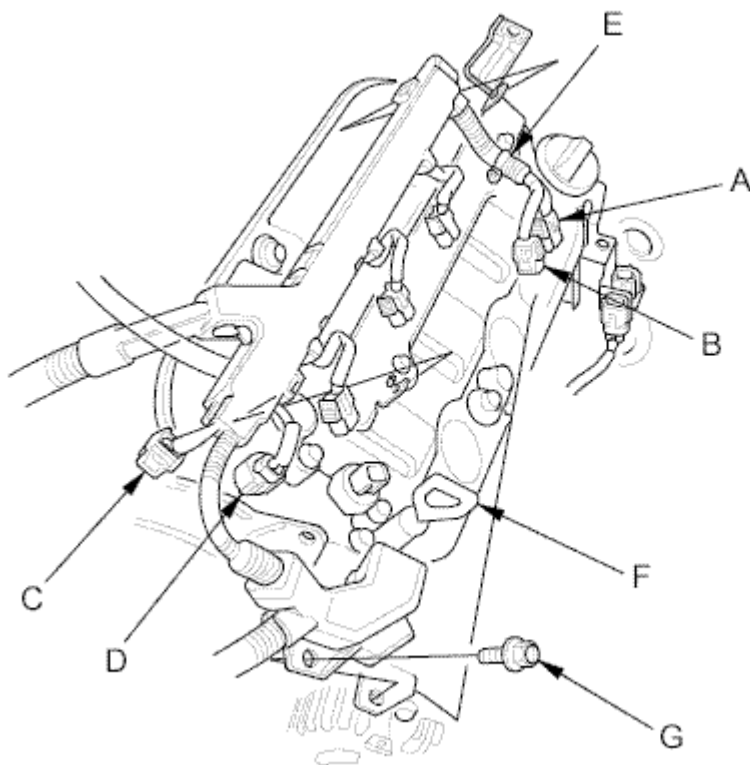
Identifying Cylinder Head Cover, Harness Clamp, Dipstick And Connectors
